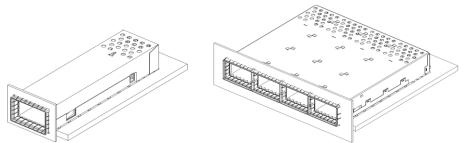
1x1 and 1x4 cage, host PCB and panel
